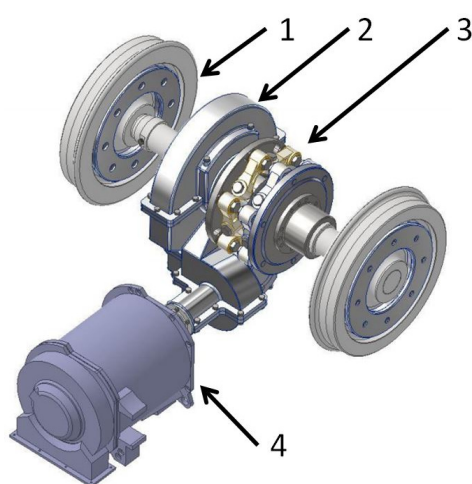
Components of the propulsion system [4]: 1. Wheelset; 2. Gearbox; 3. Centaflex A coupling; 4. Motor.
